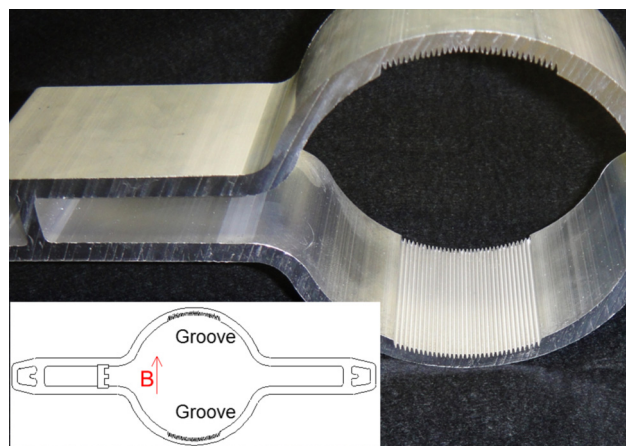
(Color online) Cut sample and the cross-section of a beam pipe with groove structures for the LER bending magnet.
